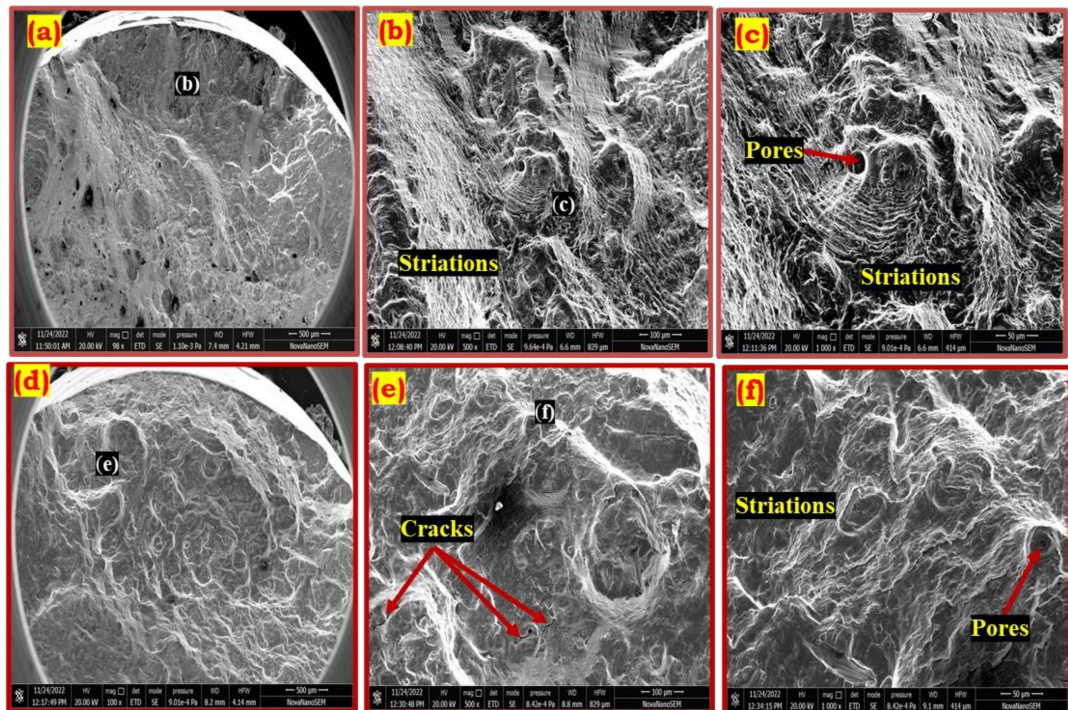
Fractographs of fatigue tested samples: (a-c) 0° AB and (d-f) 45° AB.
